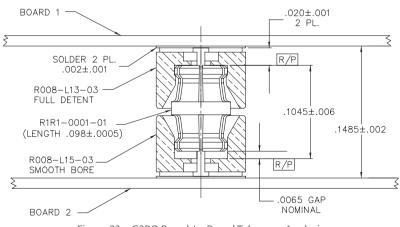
G3PO Board-to-Board Tolerance Analysis
